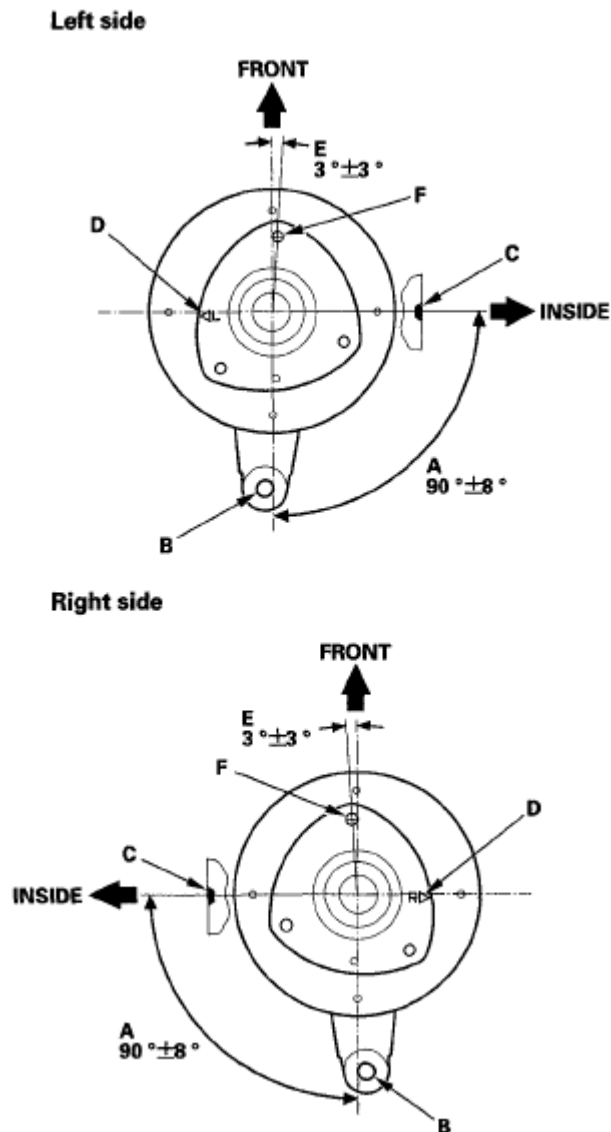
Aligning Angle Of Ball Joint Connecting Hole And Cutout
